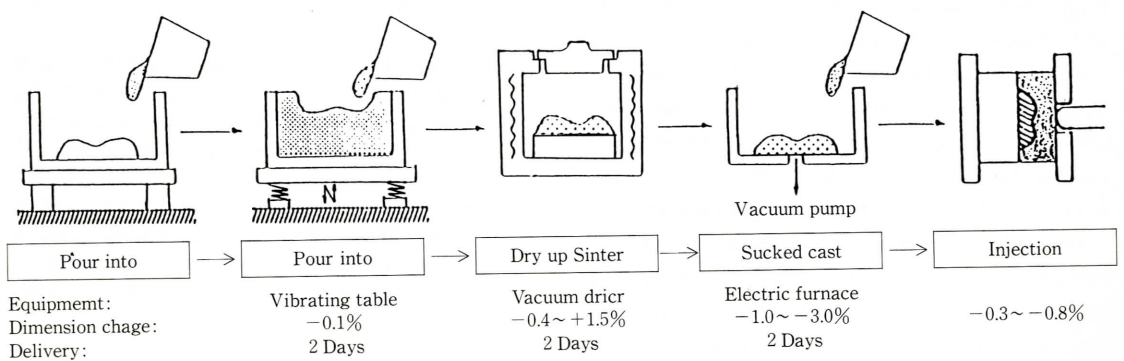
Transprinting attribute, dimension change, delivery, material and equipment of the process
